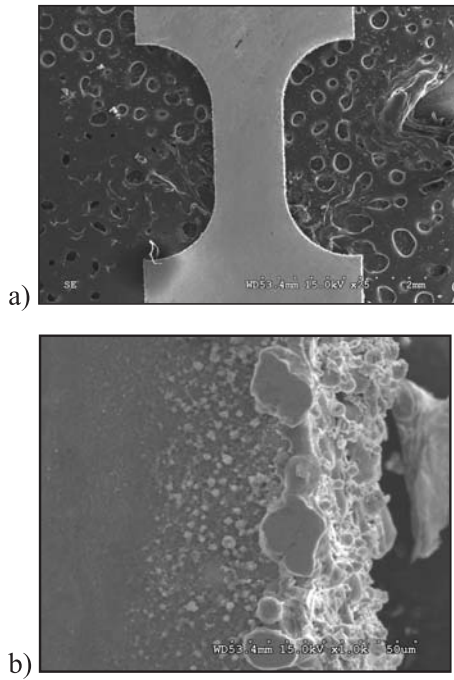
SEM image of a specimen machined by electro-sparking machine (a) and on the oxides layer at their edge (b)
